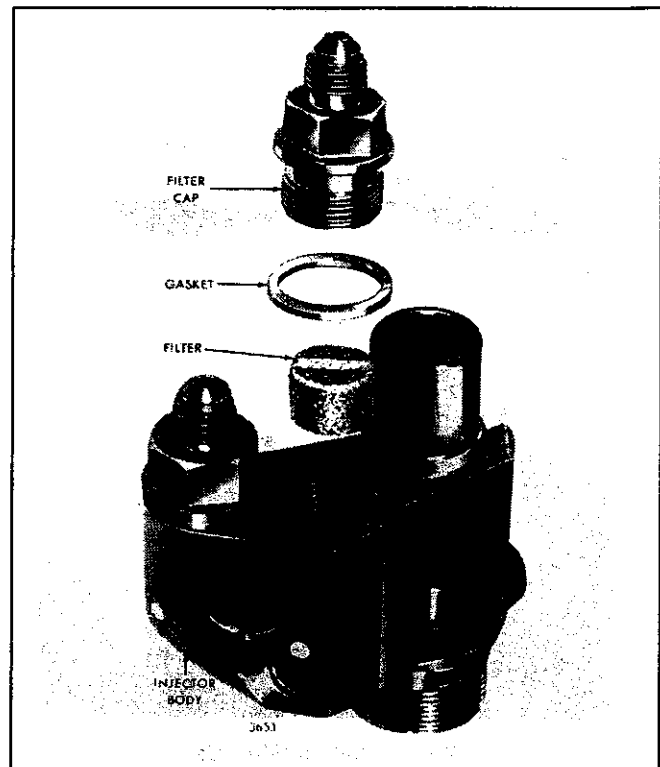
Details of Injector Filters and Caps and Their Relative Location
